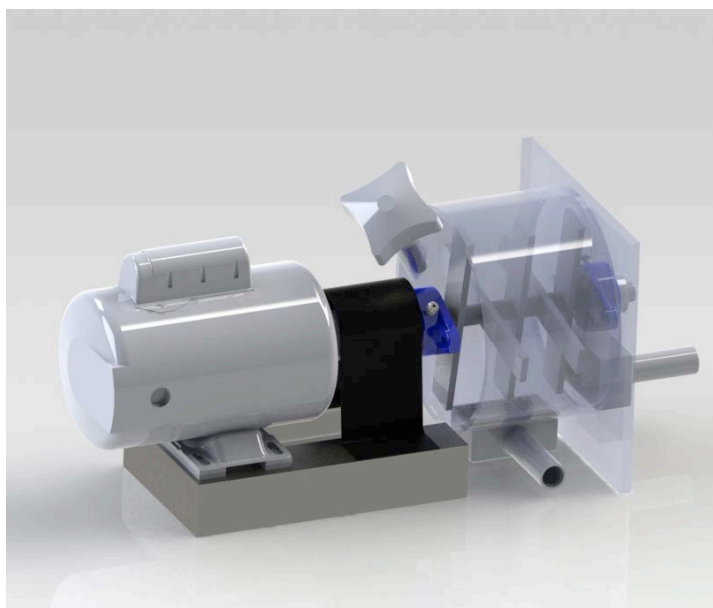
SOLIDWORKS DESIGN OF THE HAMMER-MILL FOR CRUSHING UO_2 FUEL PELLETS
